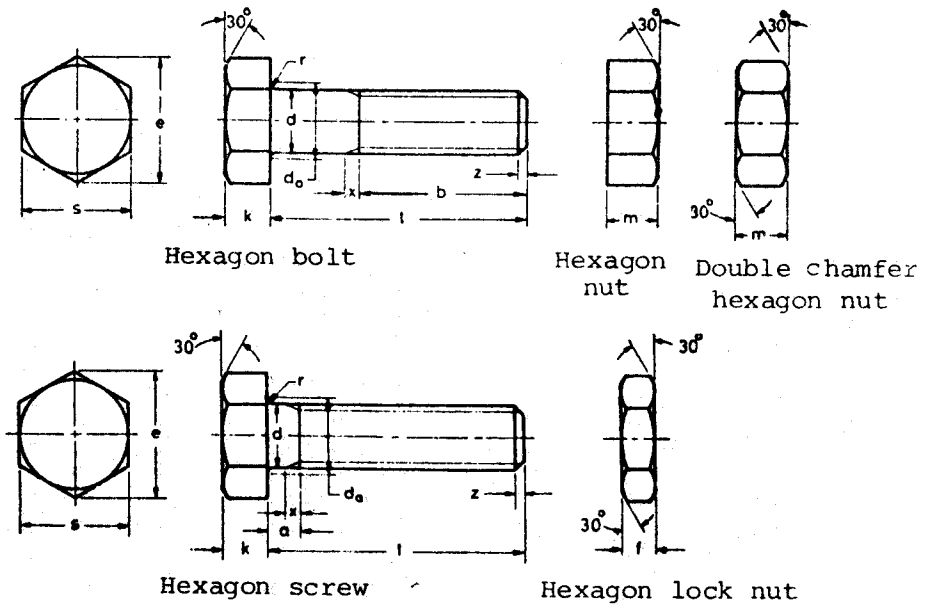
Dimensions of bolts, screws, nuts and lock nuts
